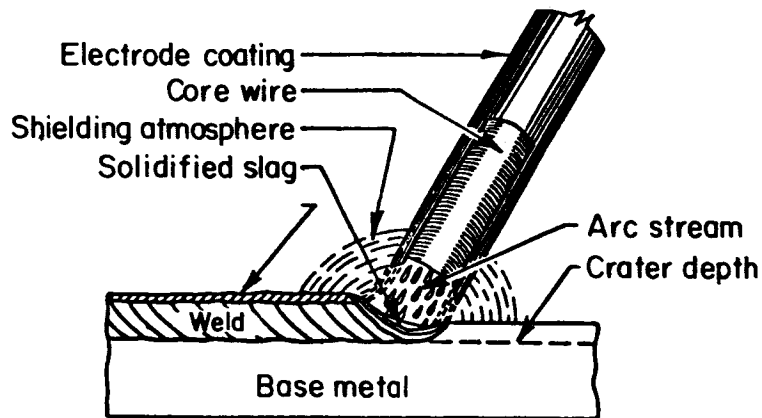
SCHEMATIC REPRESENTATION OF THE SHIELDED-METAL-ARC-WELDING PROCESS (REF. 33)
